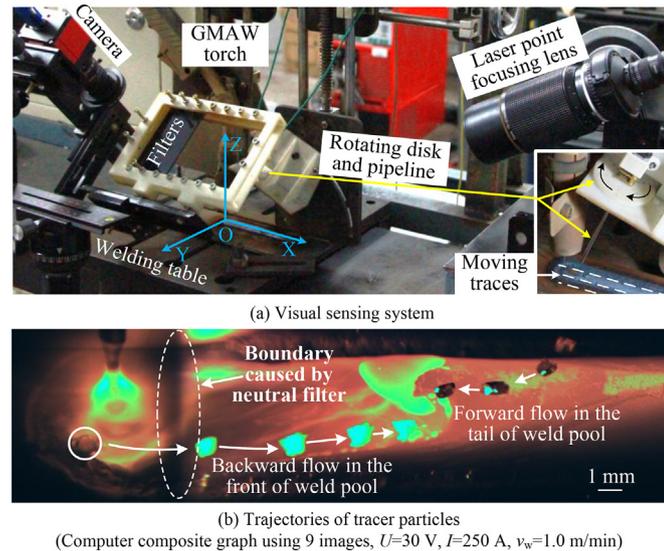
System used to observe fluid flow on weld pool surface in GMAW process.
